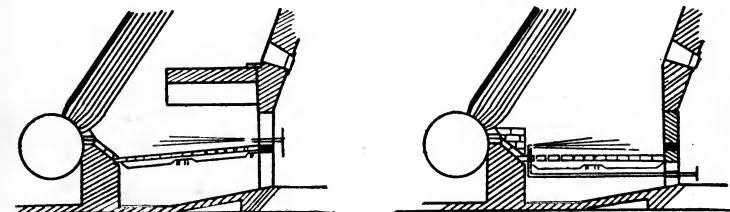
,351 and 4,352.—Arrangement of oil furnace for water tube boilers with horizontal and vertical baffles.
